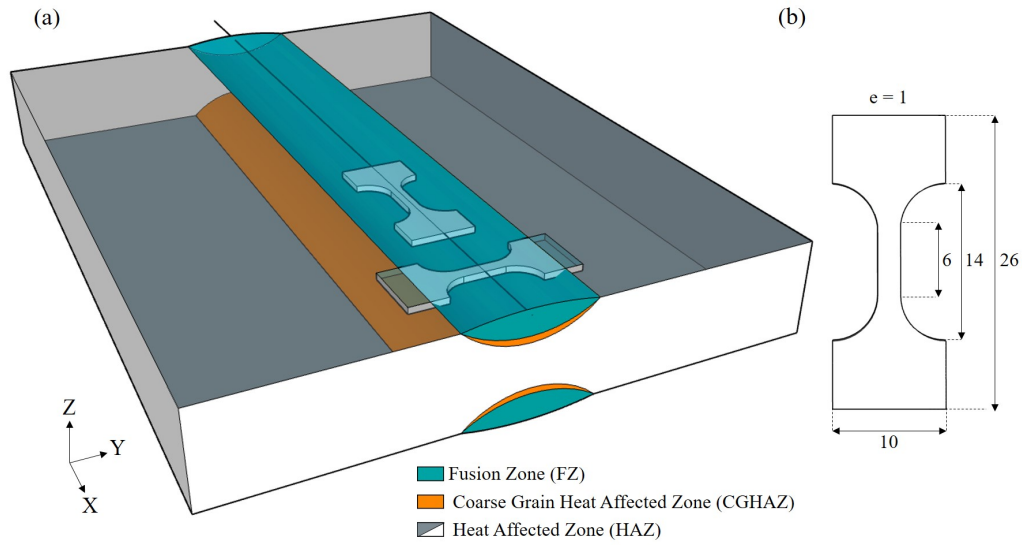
3D scheme of tensile samples (a) location and (b) geometry machined from the single-pass welded plate (dimensions are in mm).
